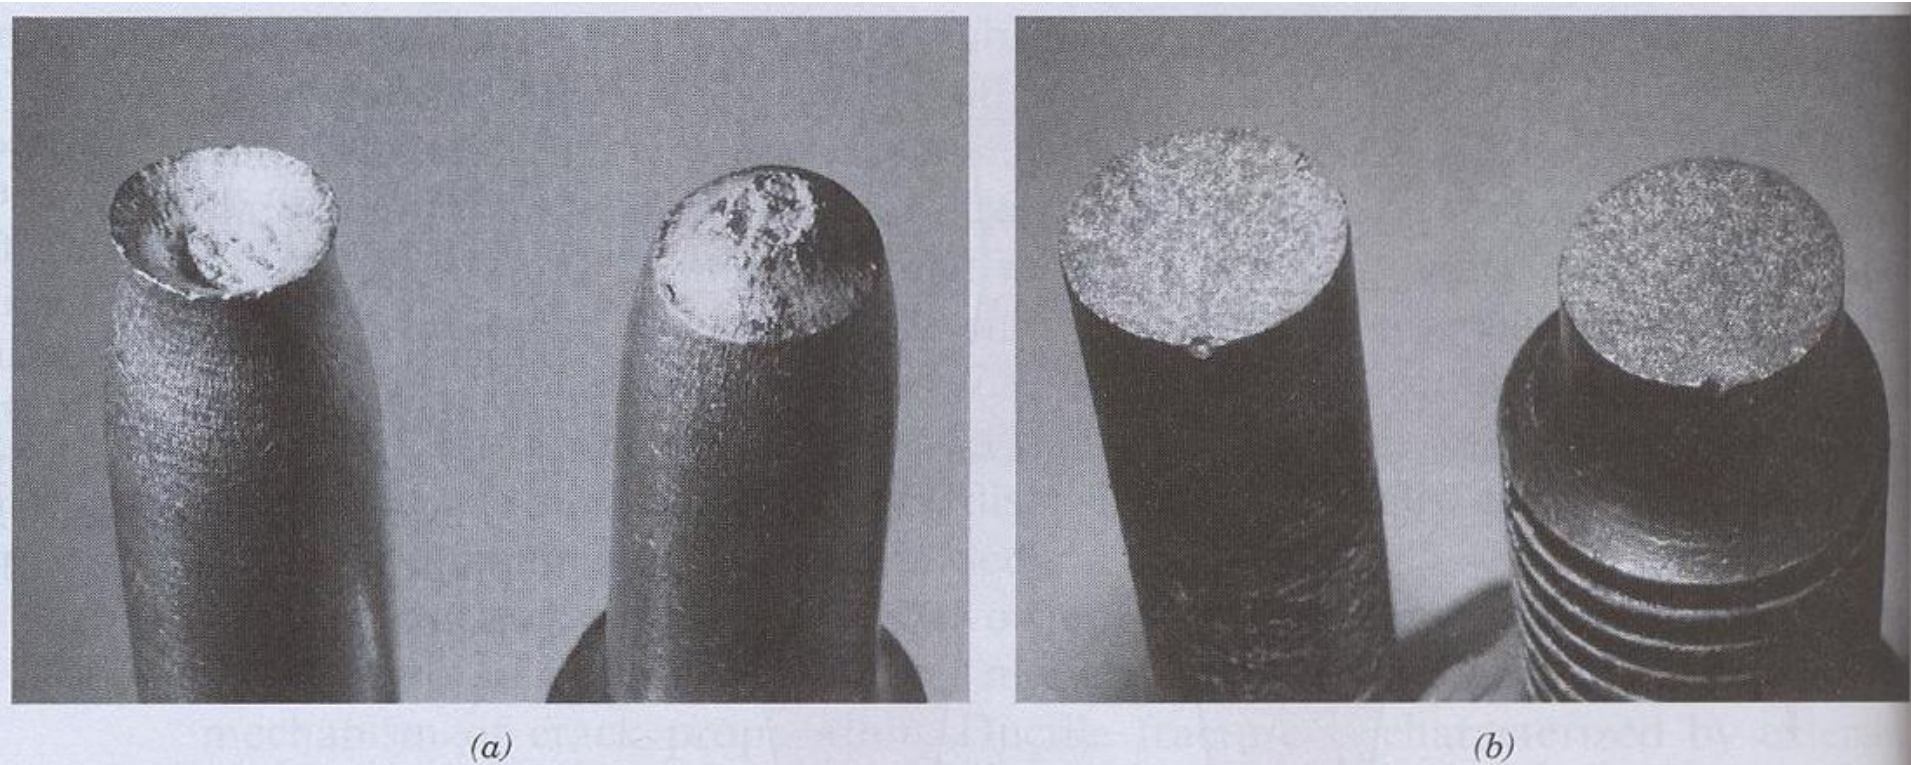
(a) Cup-and-cone fracture in aluminum. (b) Brittle fracture in a mild steel.
